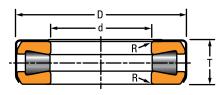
Type TTC thrust tapered roller bearing assembly.
